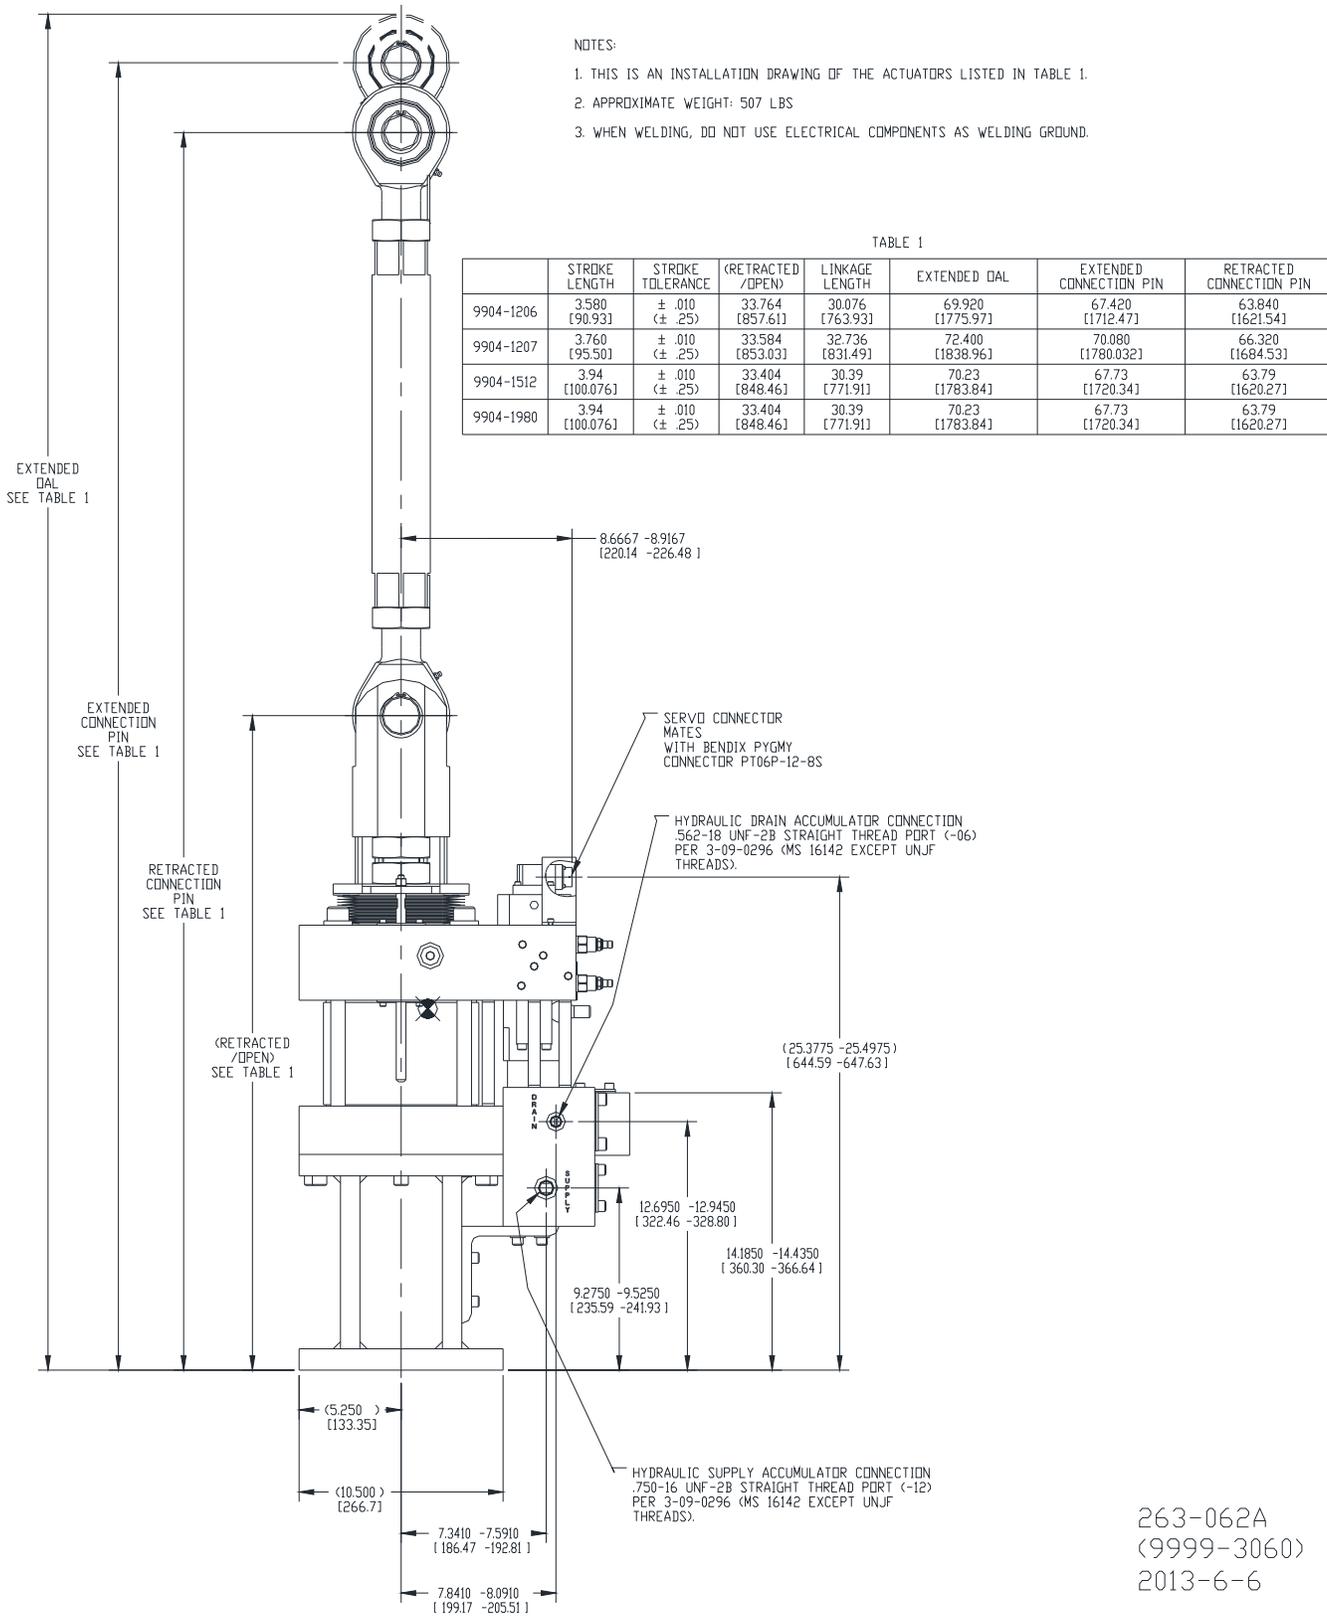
9F IGV Actuator, High Pressure Trip without internal check valve (left side view)
